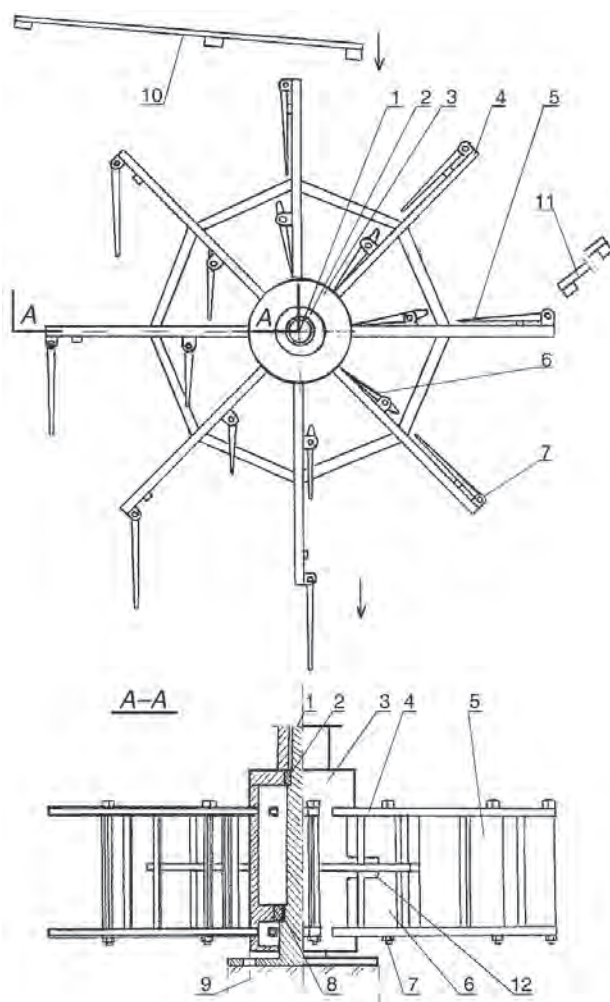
Schematic cross-section and axial turbine rotor assembly of the wheel water turbine with the current steering: 1 – shaft set on a foundation, 2, 8 – bearings, 3 – a rotating cylinder mounted on bearings 2 and 8, 4 – arms in the form of frames, created from two longitudinal elements instructed the cylinder 3, 4a – transverse axial coupling elements booms 4, which are support for the free blades 5 and 6, 5, 6 – blades mounted rotationally, 7 – hinges on which the blades are mounted to the arm 4, 12 – chosen room for switches of the blades during rotation 6 of the boom 4
